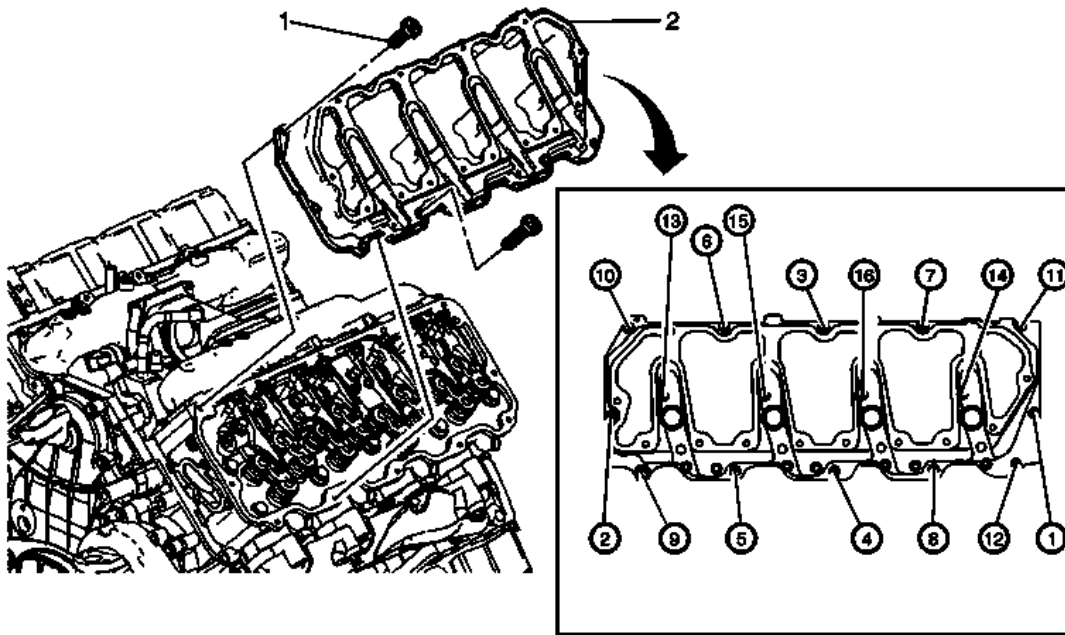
Valve Rocker Arm Lower Cover And Fasteners With Tightening Sequence - Left Side
